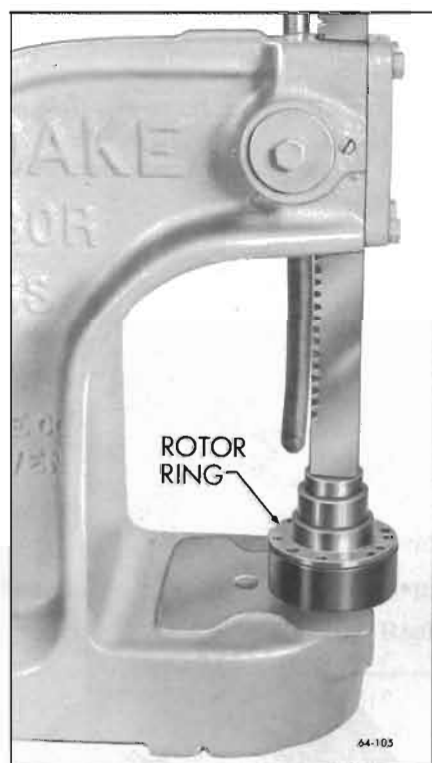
Pressing Rear Bearing from Rotor Ring
